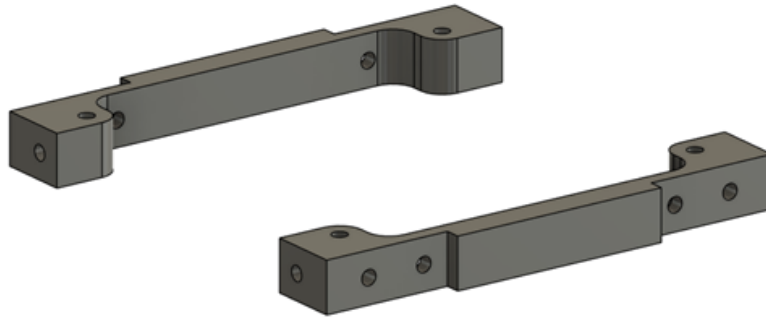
1U Top Member top view (left) and bottom view (right)
